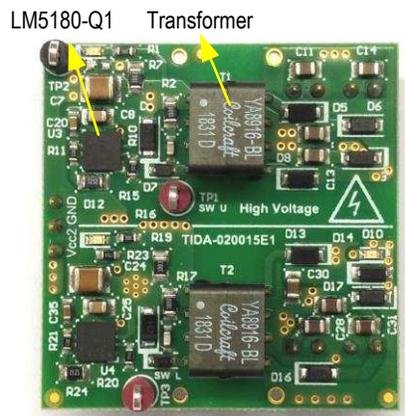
LM5180-Q1 Based Flyback PCB Board Bottom Side
